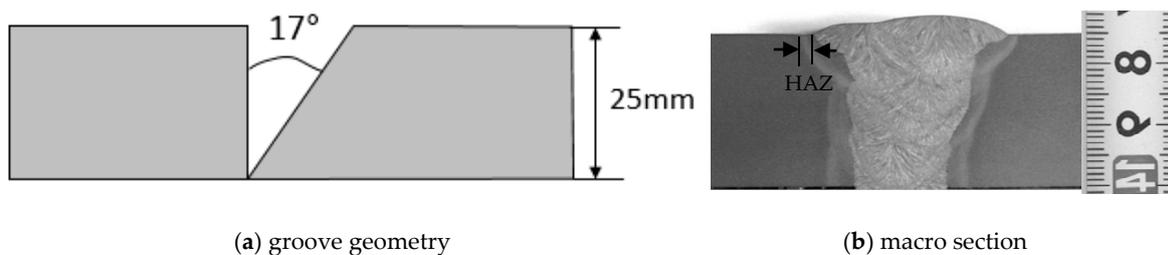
Groove geometry and macro section of the weld joint.
